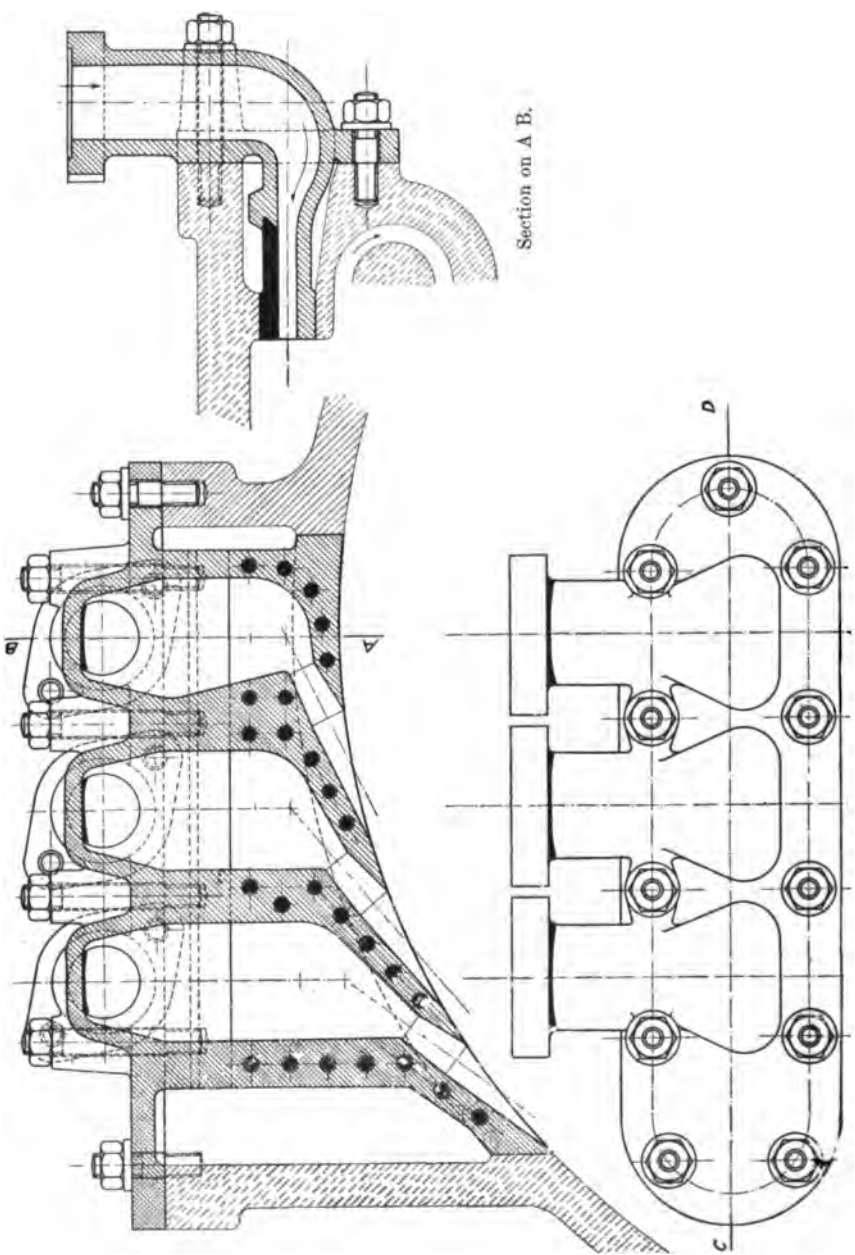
Construction of Nozzles for 300 Horse-power Union Steam Turbine.
